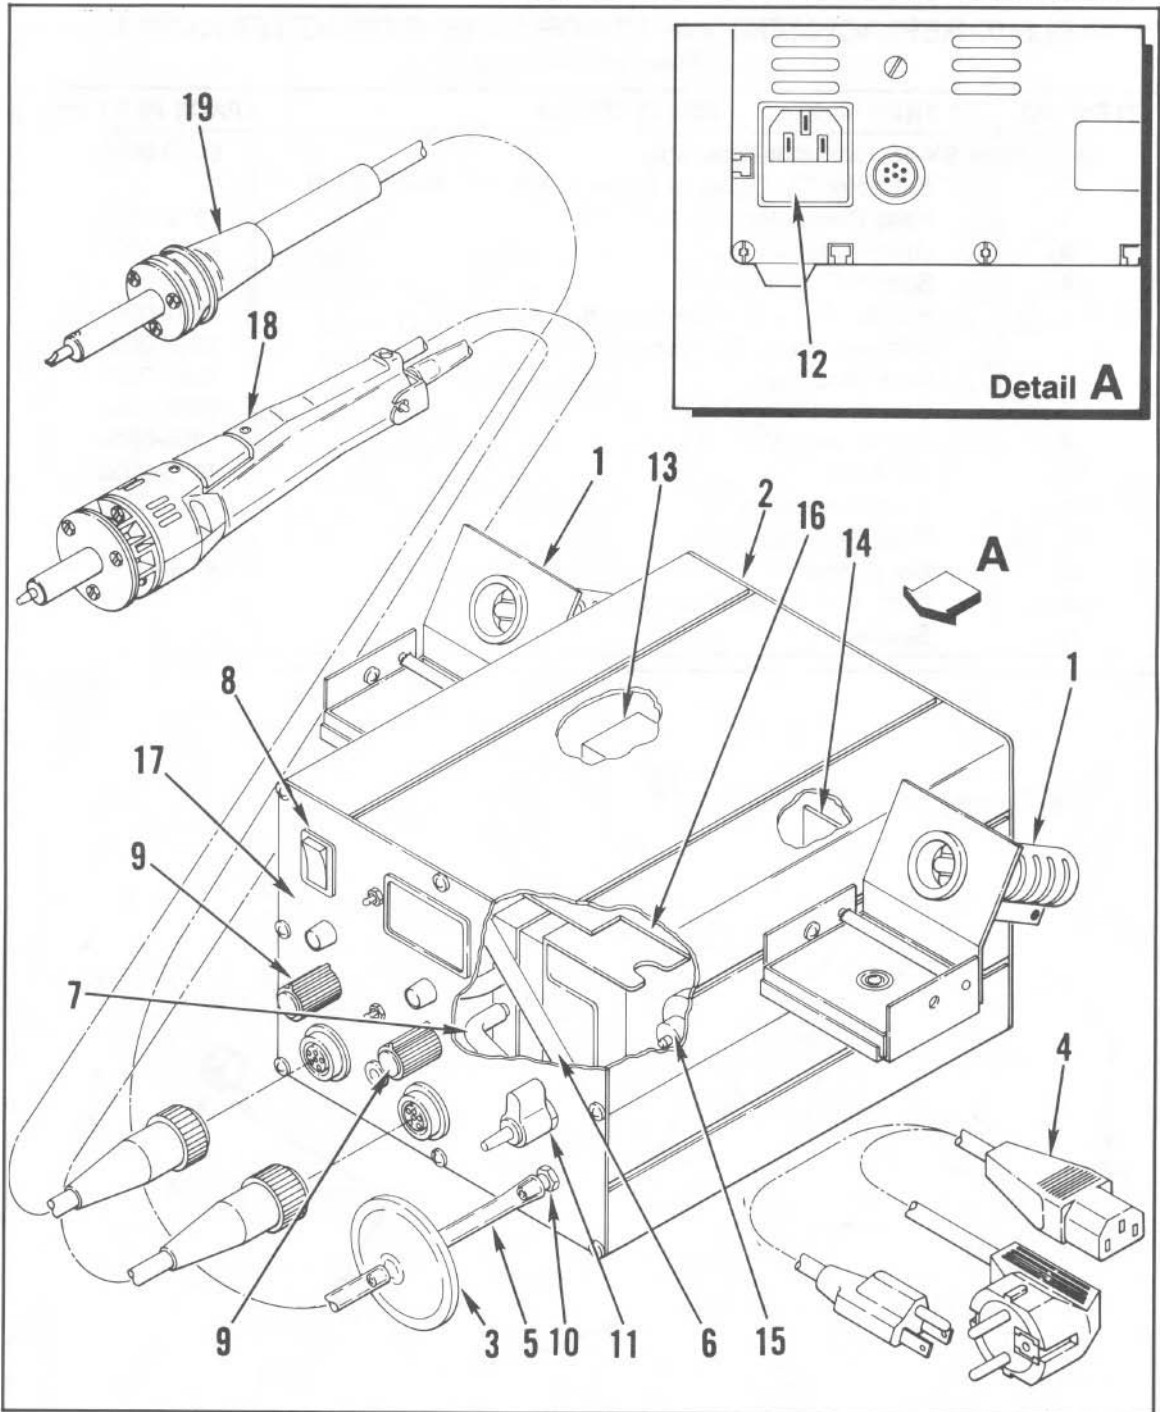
REPLACEMENT PARTS FOR MBT-210/MBT-210E
